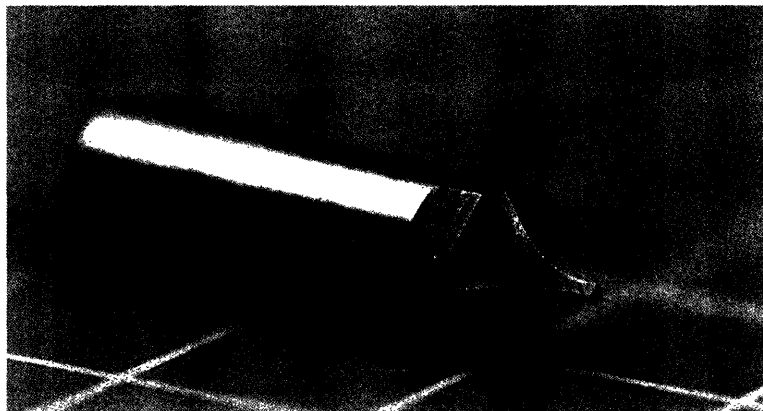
Test Bit manufactured with the Wire EDM Machine.
